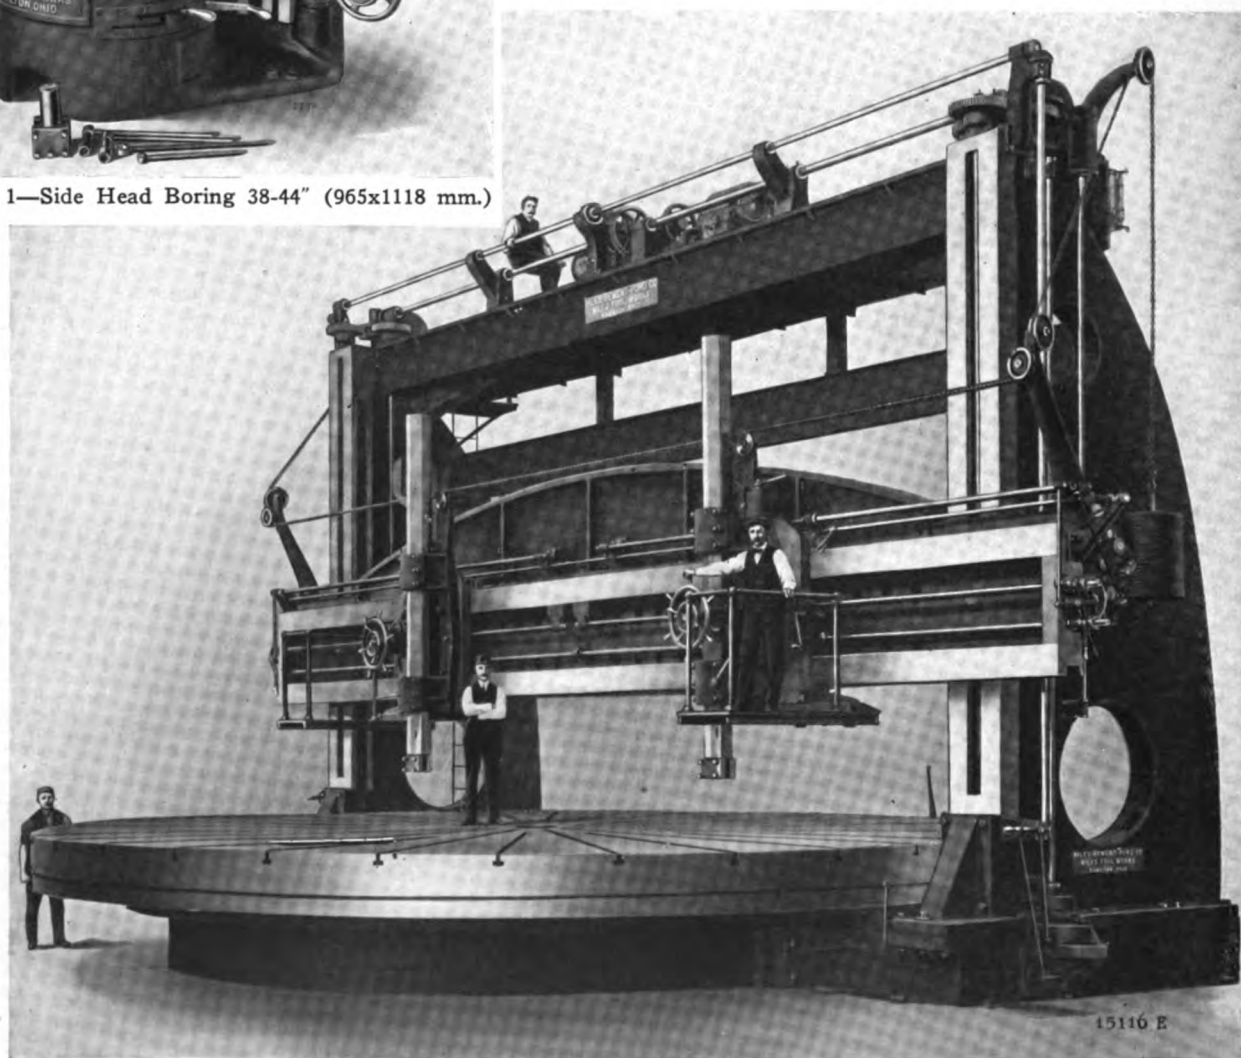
36-Ft. (11M.) Heavy Boring and Turning Mill
